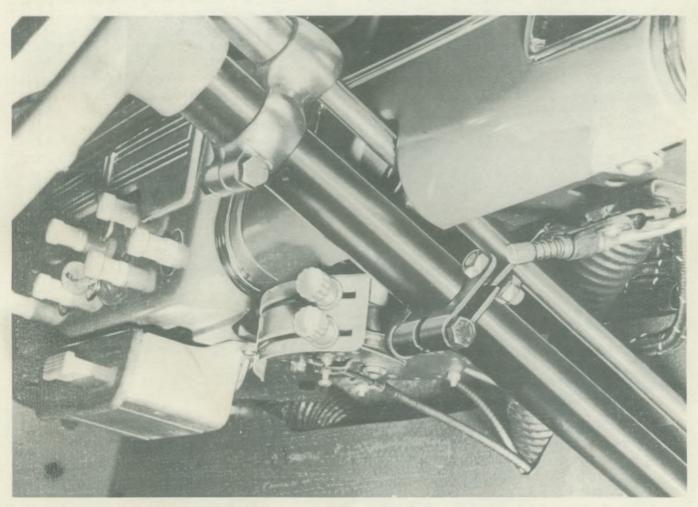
Showing the position of the control assembly on a R.H.S. Model
